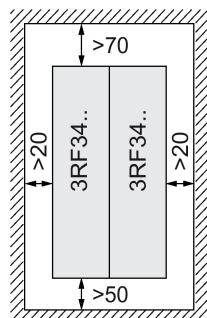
Clearances for mounting side by side (dimensions in mm)
